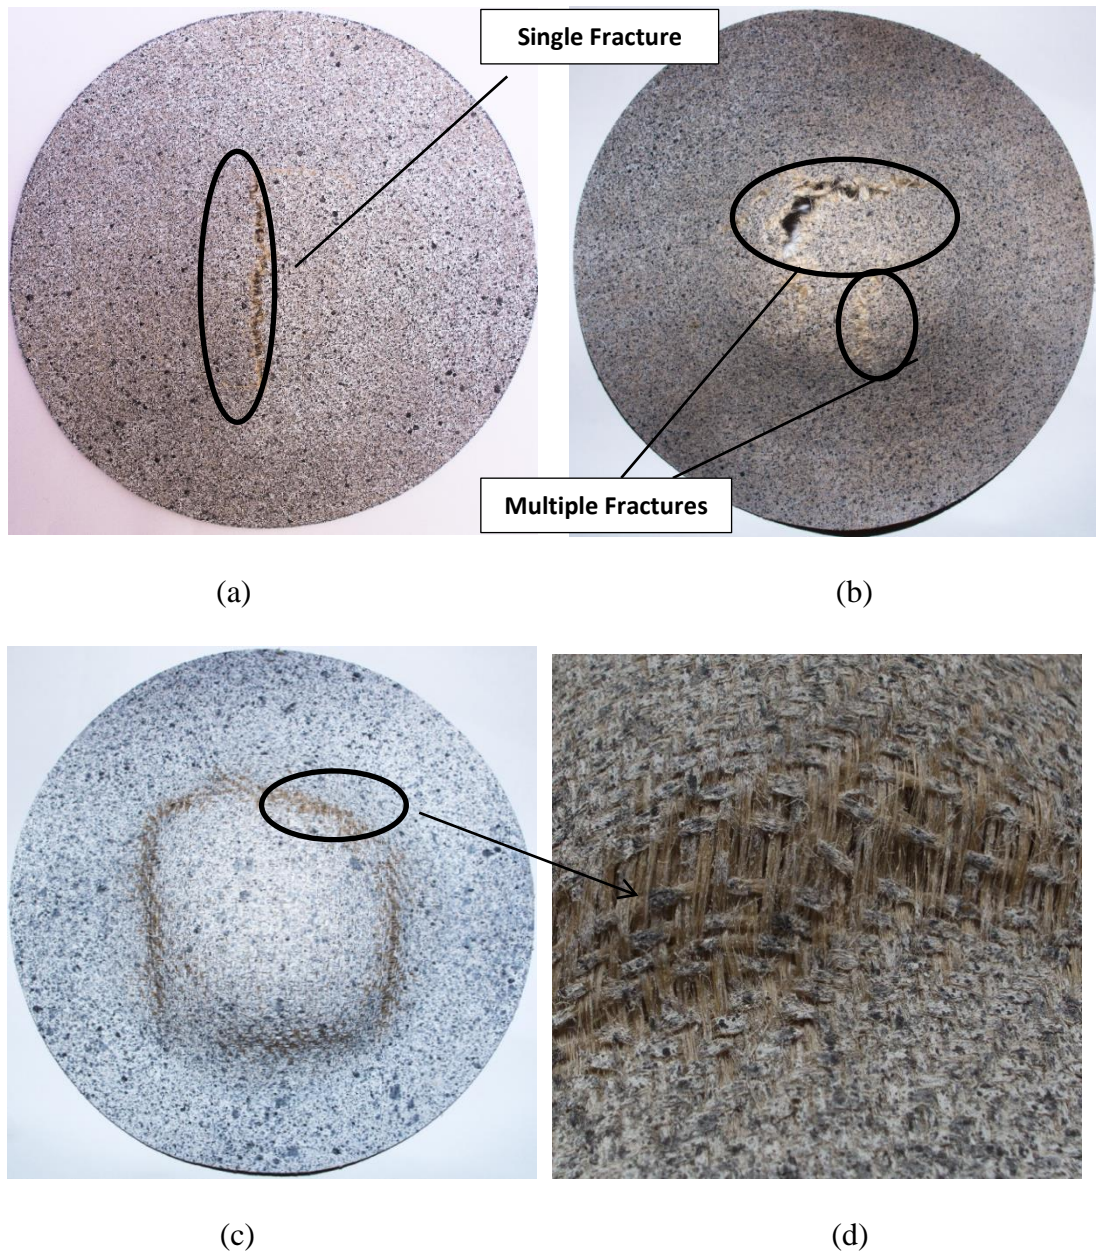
Tested samples formed (a) below 100°C; (b) between 100°C and 150°C; (c) at 160°C; (d) close-up view of fibre pull out with some fibre breakage in the sample formed at 160°C.
